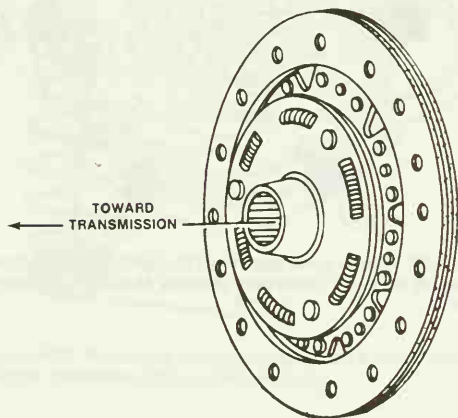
The long part of the clutch hub assembly usually points toward the transmission. (Nissan Motor Corporation in USA)
